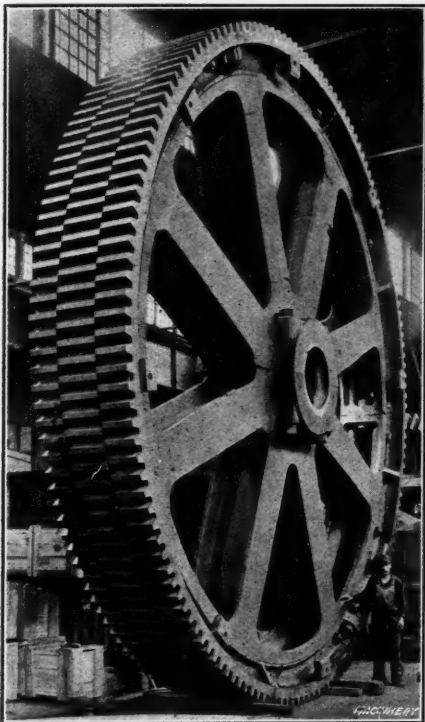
Large Gear built by the Mesta Machine Co.—Diameter, 22 feet 8 inches; Circular Pitch, 5½ inches; Face Width, 38 inches
